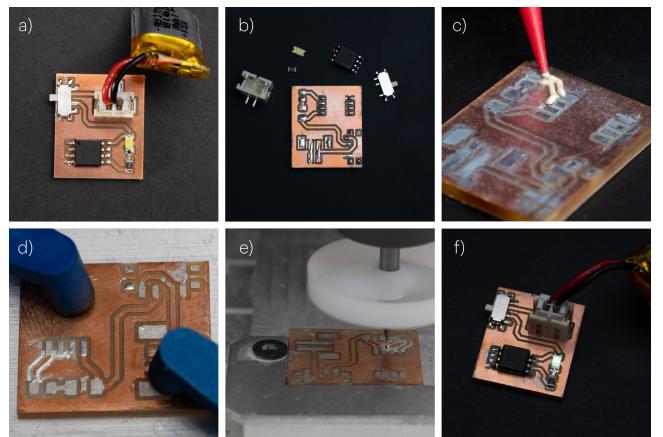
Fabrication workflow: a) old board, b) desoldering, c) manual epoxy deposition with a stencil, d) epoxy curing, e) engraving new traces, f) new functional PCB with a modified trace.
